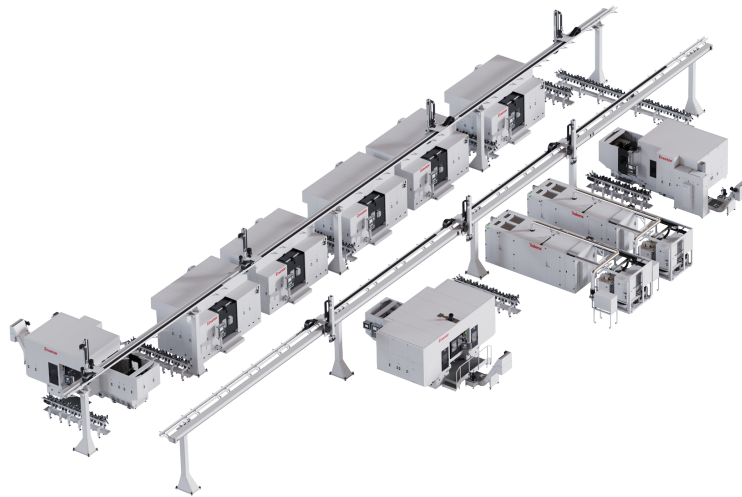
Example crankshaft machining line with numerous CNC machining centres [4]
